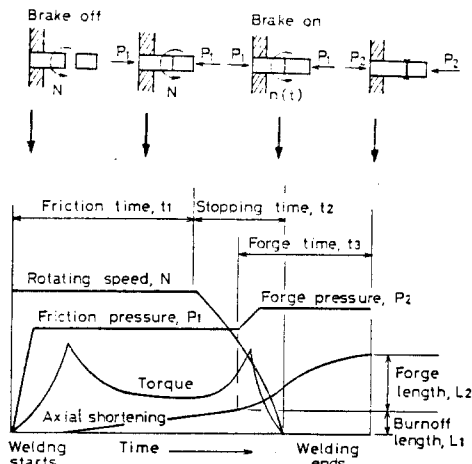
Schematic diagram of typical welding parameters of continuous drive friction welding
